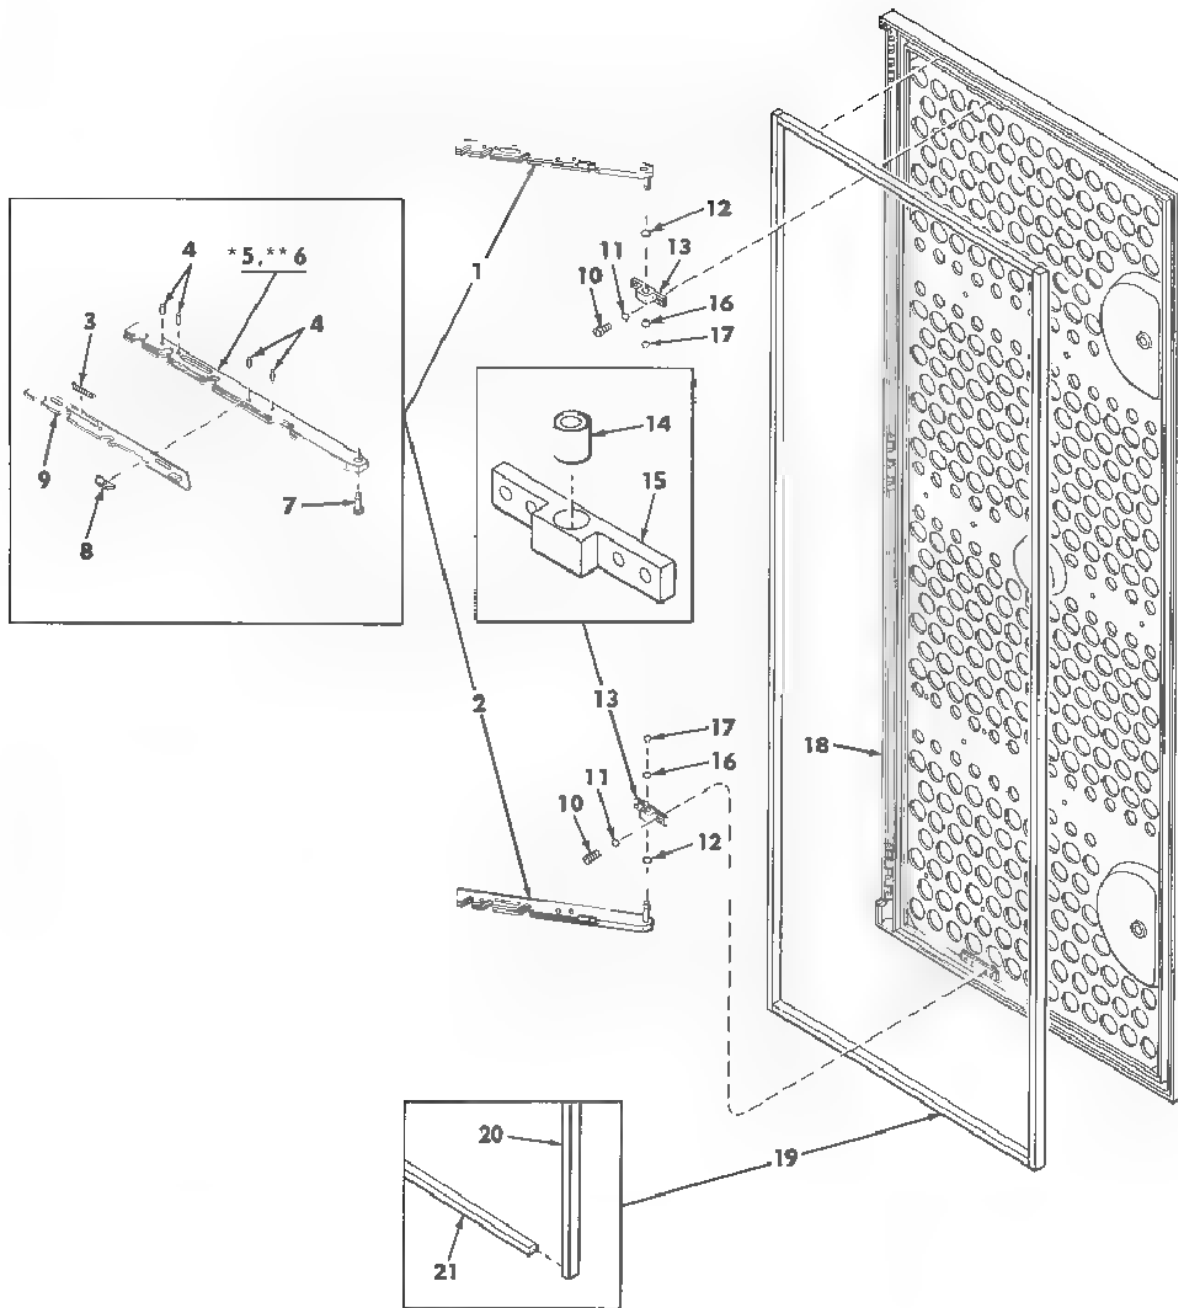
DOOR /8018622/-PARTIAL EXPLODED VIEW
